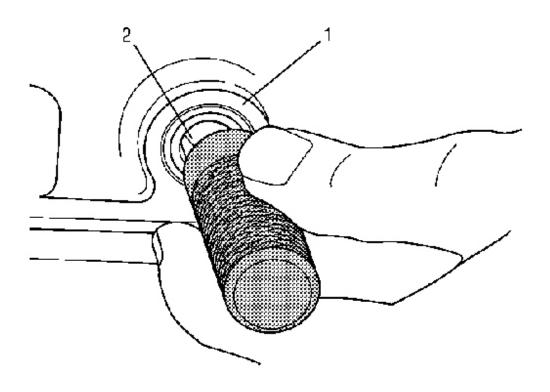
Sliding New Selector Shaft Seal Over Selector Shaft Courtesy of GENERAL MOTORS CORP.
